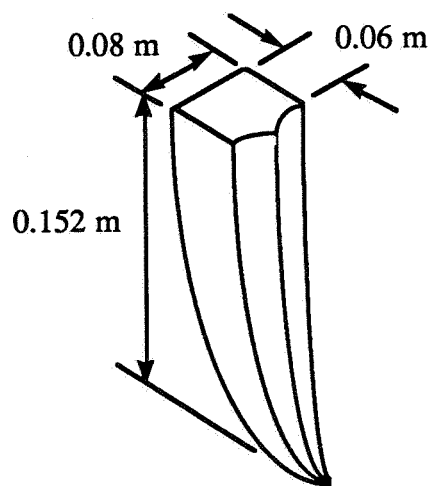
SCARIFIER BLADE DIMENSIONS.
